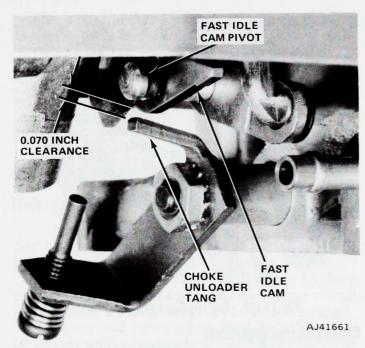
J-110 Unloader to Fast Idle Cam Clearance
